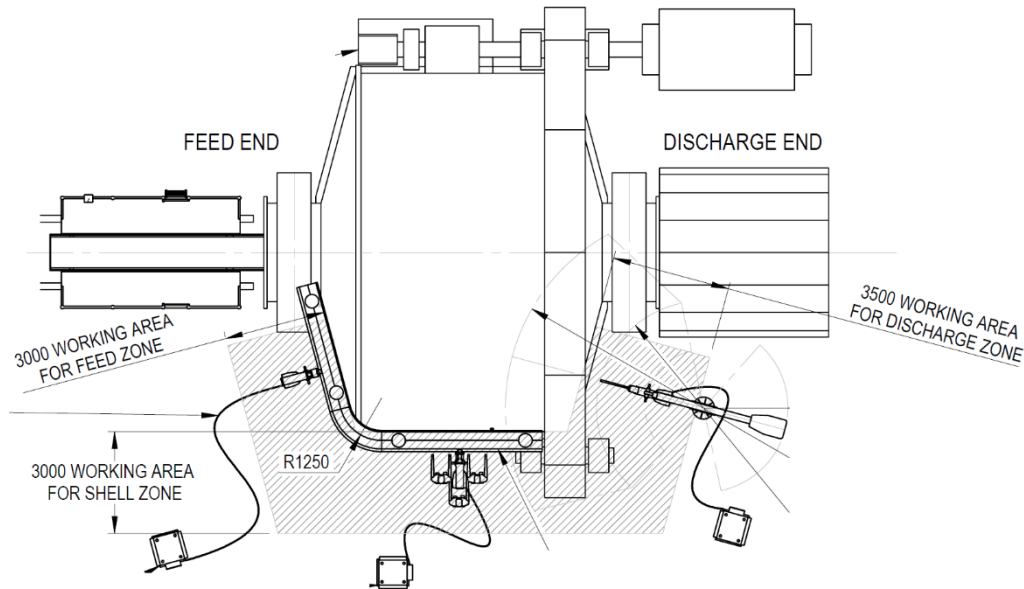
Working area to operate hydraulic recoilless hammers on a SAG mill with mill drive on one side
